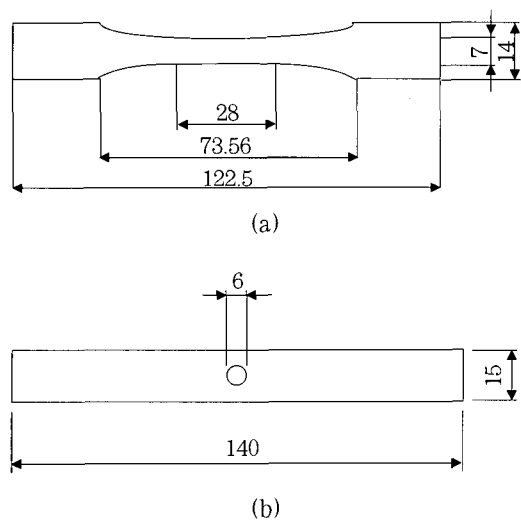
Configurations of dog-bone tensile specimen (a) and rectangular tensile specimen with a hole (b)
